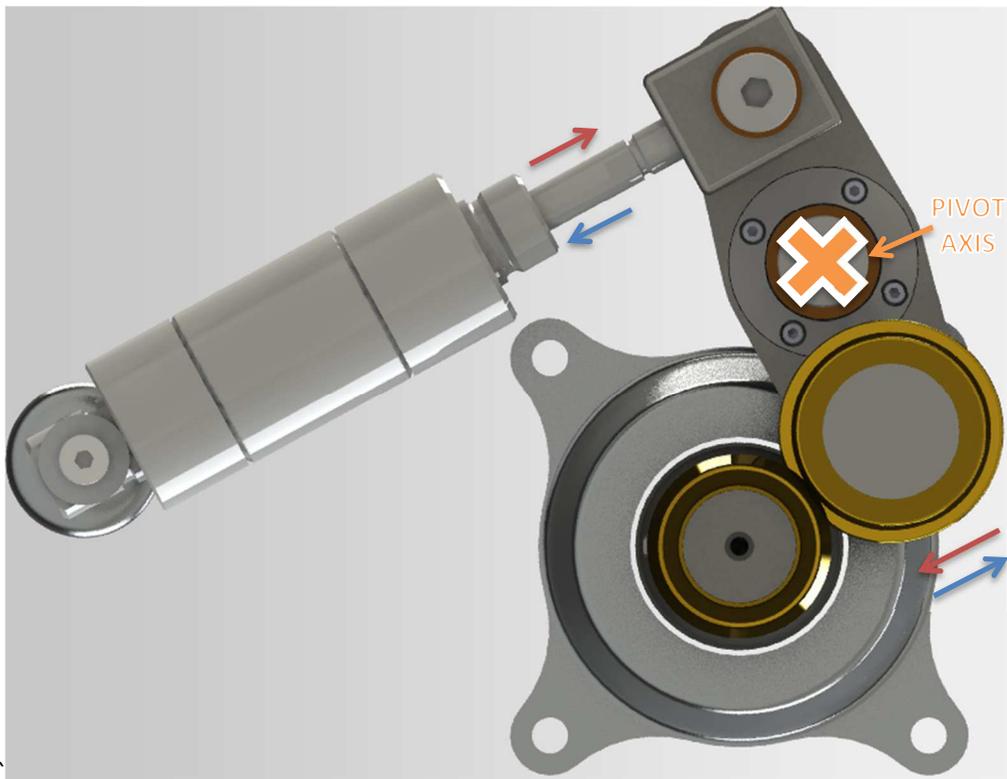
Chuck and roller assembly. Extending cylinder (red arrow) will extend the roller into the chuck. You may thread the cylinder shaft into the female block to get a shorter cylinder stroke and bigger gap between chuck and roller.
